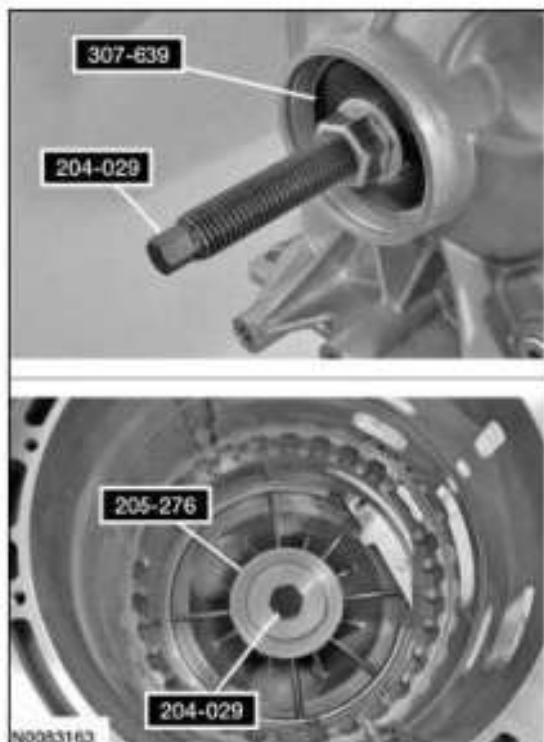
Installing Bearing On Rear Bearing Remover/Installer 307-639
